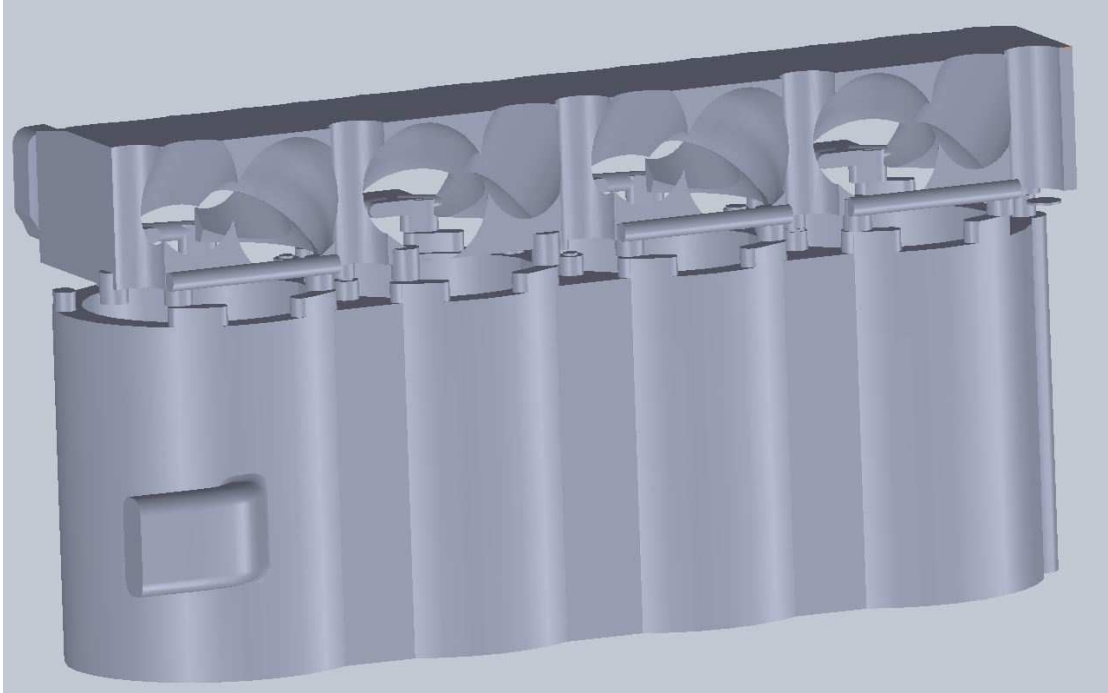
CAD MODEL FULL DRIVER'S SIDE
